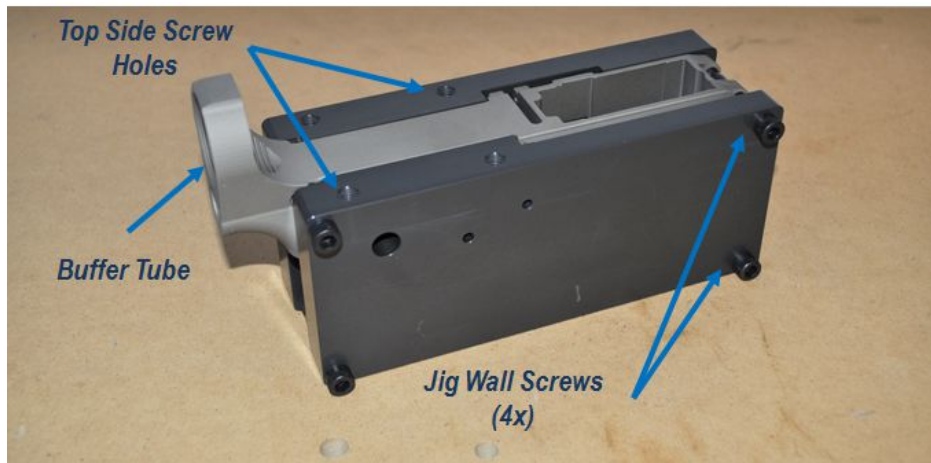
Left and right jig wall sandwiching the 80% lower, jig wall screws are in the standard position
